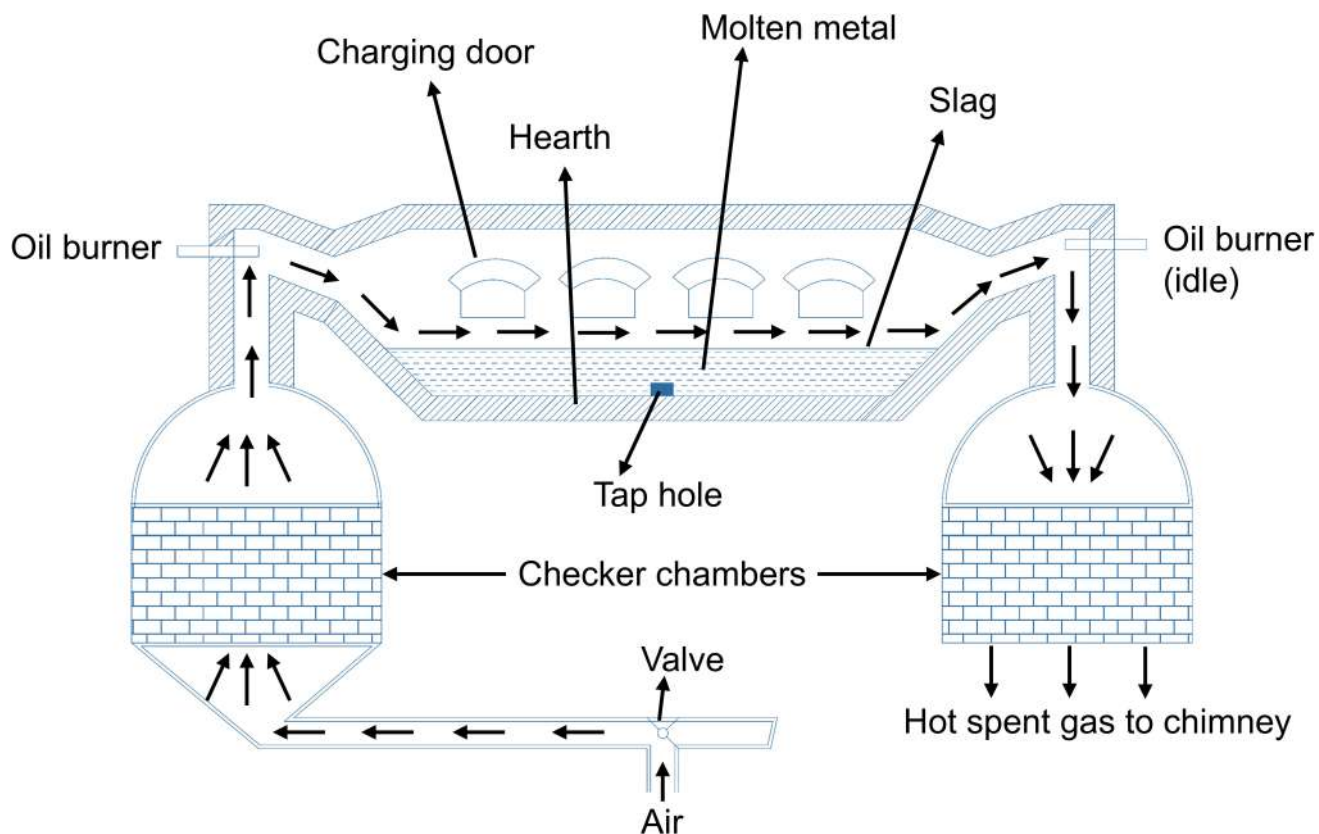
Diagram of an open-hearth furnace used in steelmaking. The figure illustrates the charging door, hearth, burners, checker chambers, and tap hole. Preheated air and gas pass through checker chambers to
